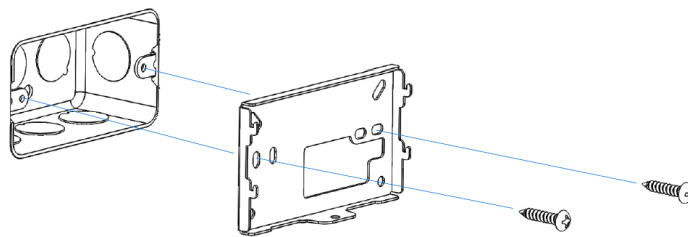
Install small Wall Mount frame with 1 gang embedded junction box.
